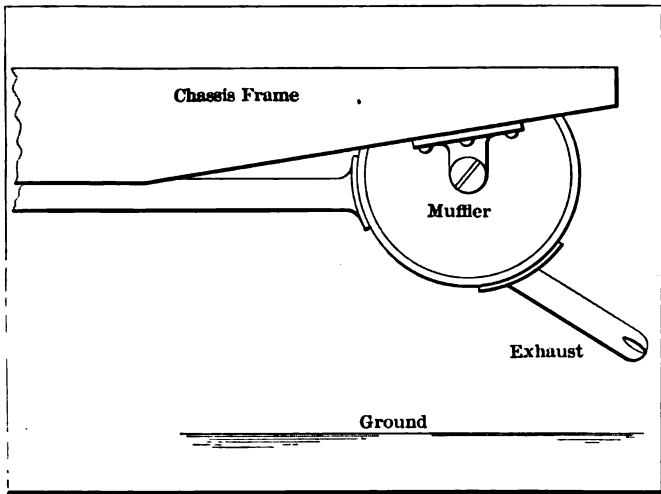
Flexibly mounted muffler, showing the exhaust pipe in the wrong position
